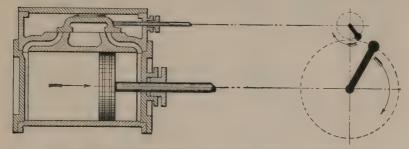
Valve Position with Exhaust Port Closed on Crank End
